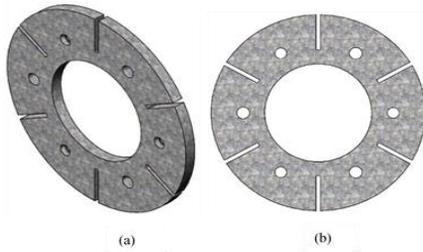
(a) Isometric View of Armature (b) Front View of Armature
